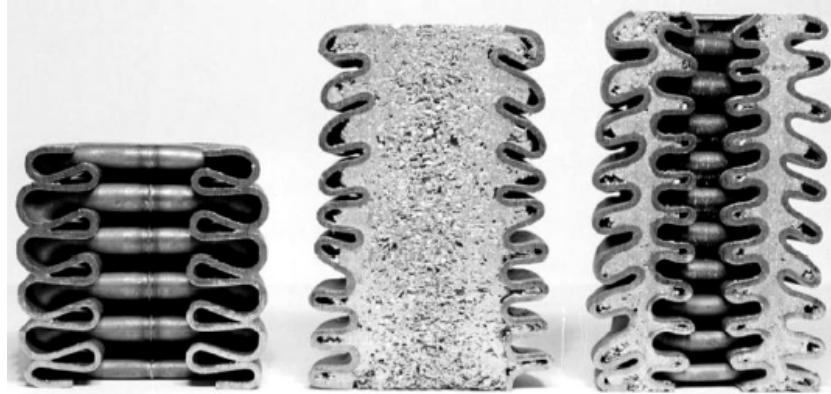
Square tube specimens including aluminium foam filled specimen and two tubes in parallel with foam in between them [37].
